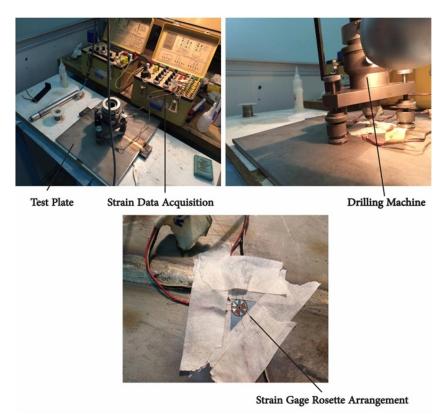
Measurement of welding residual stress by hole-drilling strain-gage method شکل 6 اندازه گیری تنش پسماند جوشی به کمک روش کرنش سنجی سوراخ
